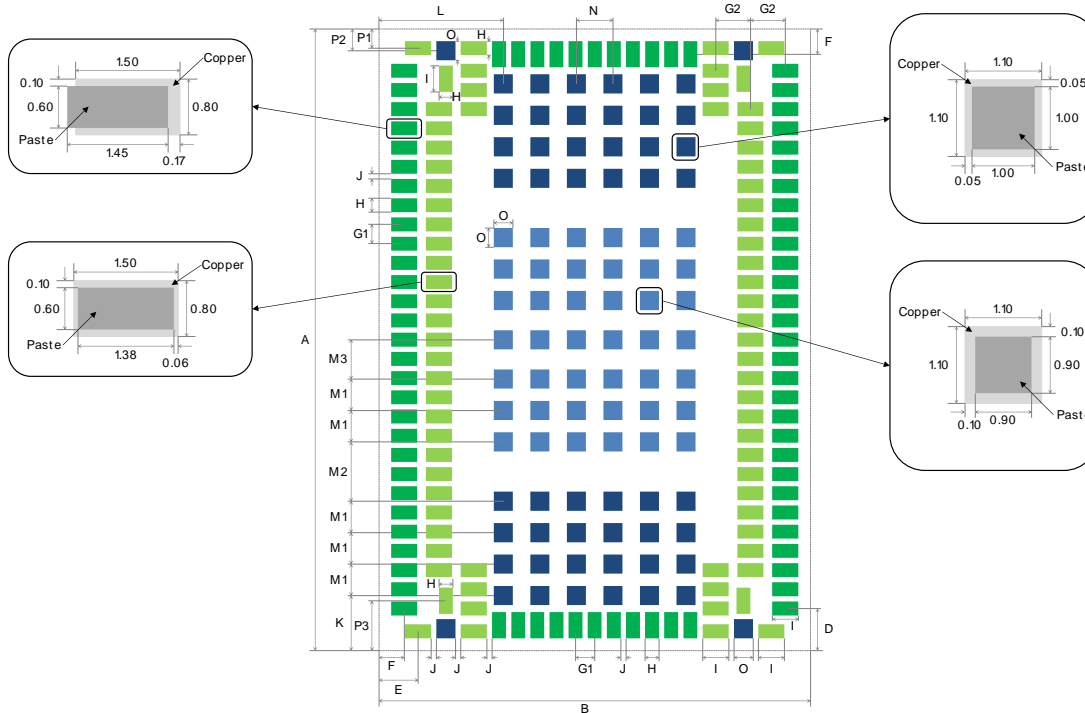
Suggested footprint and stencil design for TOBY-L3 modules, to be implemented on application PCB (top view)
